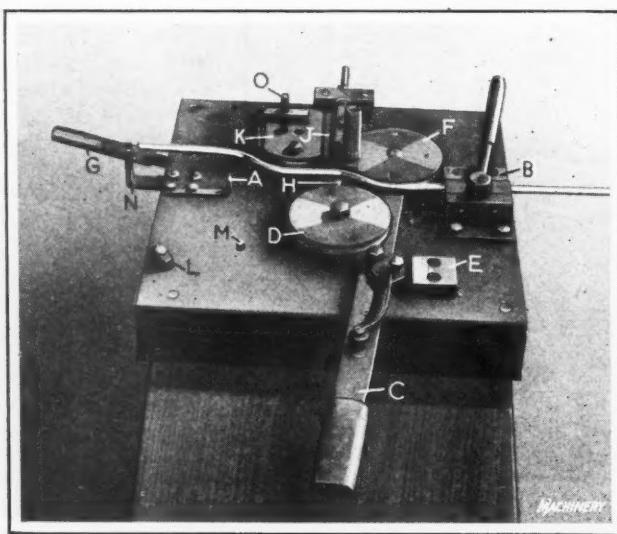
Producing the First Bends in the Tube completed by Means of the Device illustrated in Fig. 5
